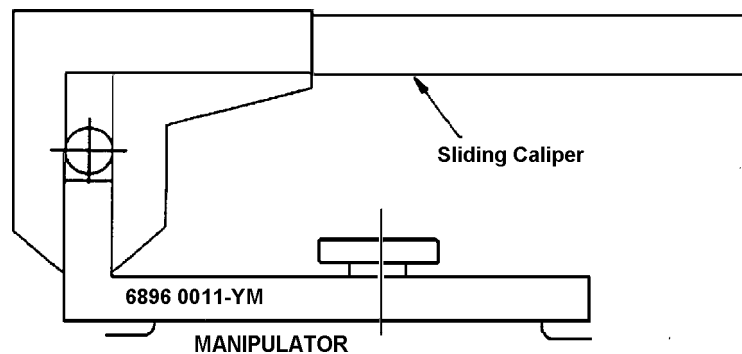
Aligning the Pin & Tool with a Sliding Caliper for Axis 1
